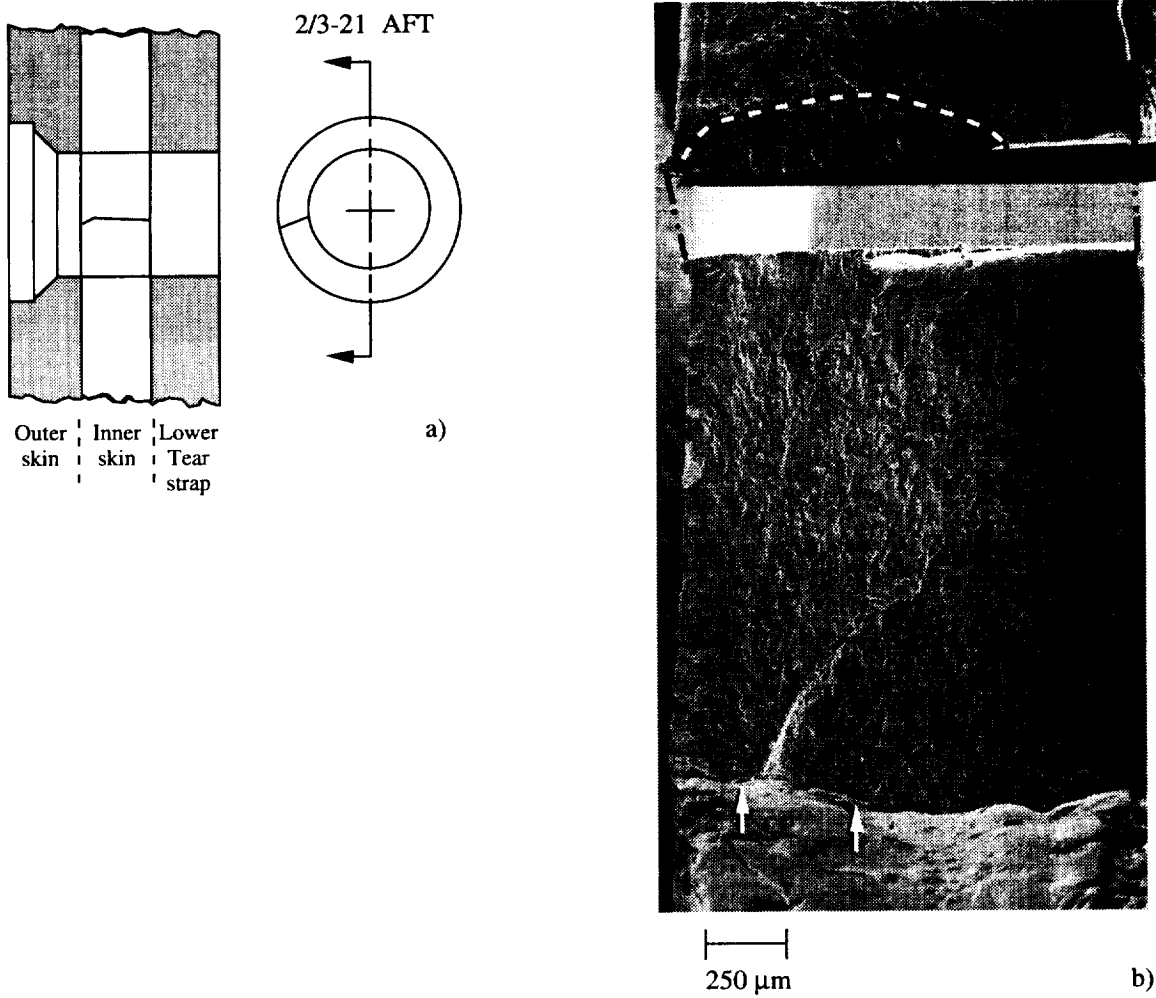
a) The schematic shows the rivet hole 2/3-21 configuration and the location of the inner skin fatigue crack oriented in the aft direction and below the 9 o'clock position. b) The SEM micrograph shows the inner skin through thickness fatigue crack fracture surface. The crack initiated at multiple sites (arrows) at the rivet hole (bottom of the micrograph). Here, the fracture surface was inadvertently cut during the destructive examination. A second specimen containing the remainder of the fatigue fracture surface is located at the top of the micrograph. The dashed line marks part of the fatigue crack front.
